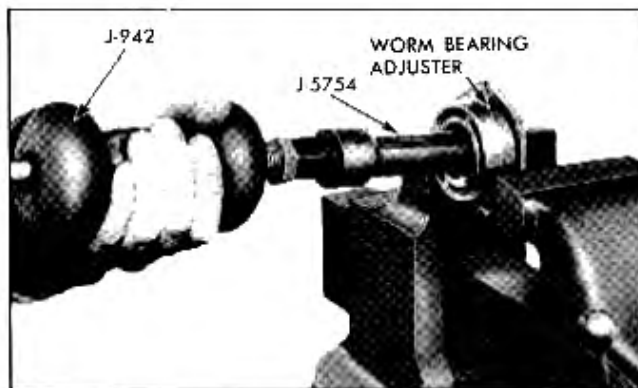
Removing Bearing Cup from Worm Bearing Adjuster
